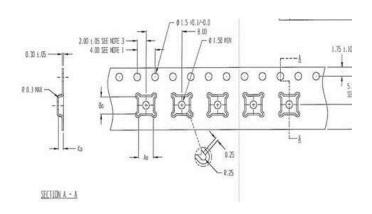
Tape drawing for 3x3mm packages Ao=3.30, Bo=3.30, Ko=1.10
